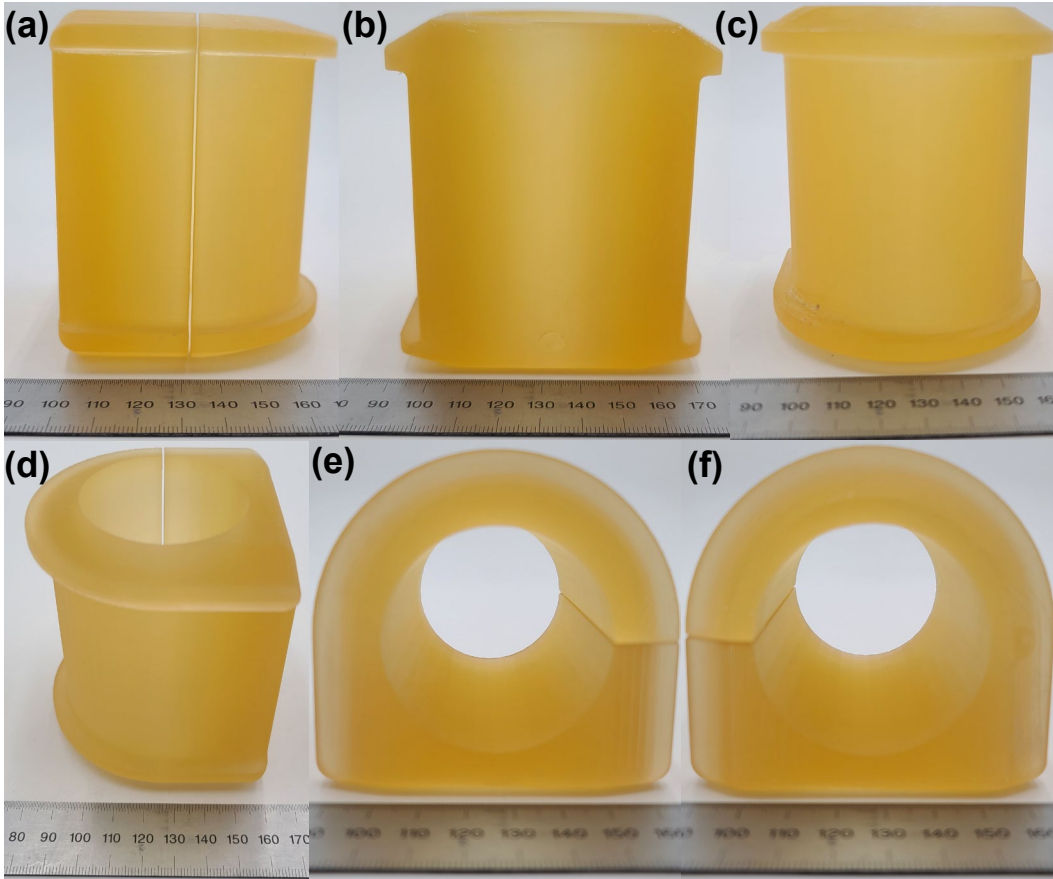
Images of the fabricated resilient mount from all sides: (a) left side view, (b) back view, (c) right side view (d) front view, (e) top view, and (f) bottom view.
